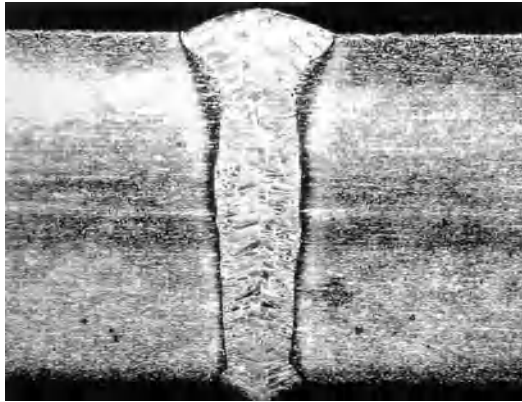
CO₂ laser butt welded joint of 3 mm thick austenoferritic stainless steel; X2CrNiMoN22-5-3 (Institut de Soudure document)
